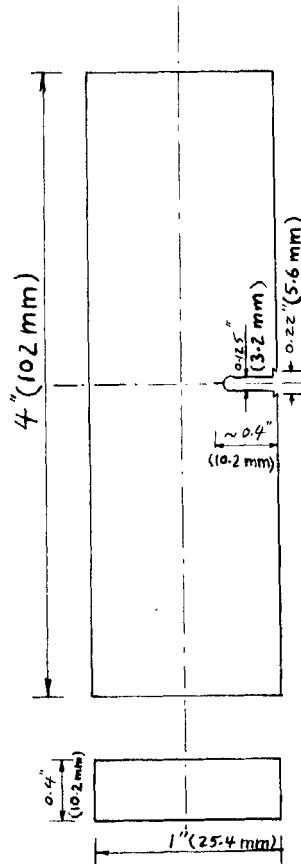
Single-edge-cracked specimen geometry used for fracture toughness (K_{IC}) measurements.
